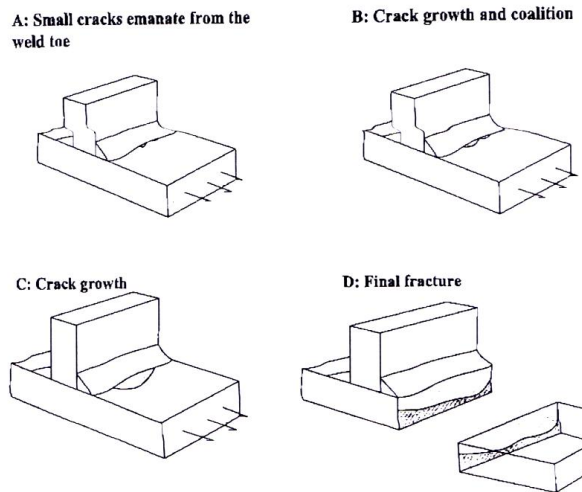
Various stages of crack growth in the fillet welded joint [22]
